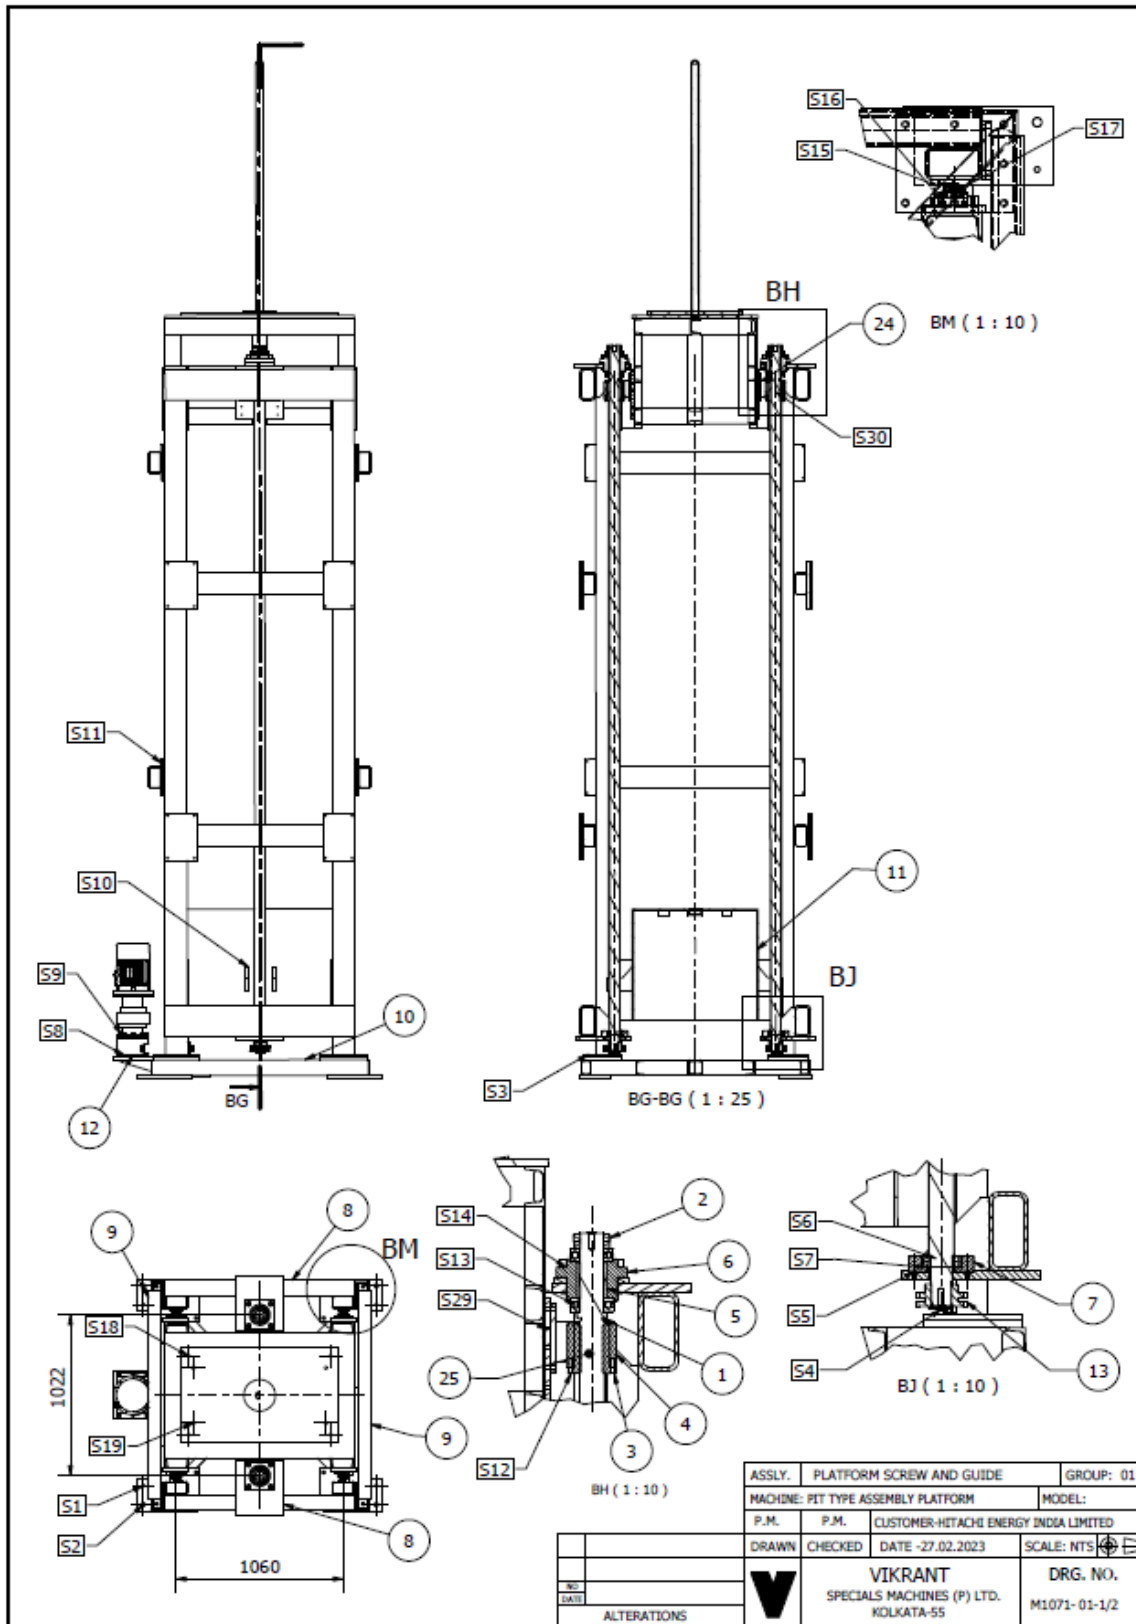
(e) Assembly drawing of Platform Screw and Guide
